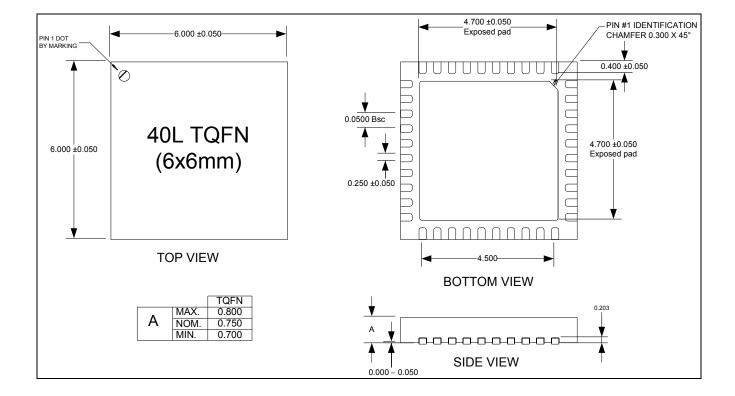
Package Dimensions: 40-pin, 6mm x 6mm x 0.75mm TQFN (0.5mm Pin Pitch) with Exposed Pad.
